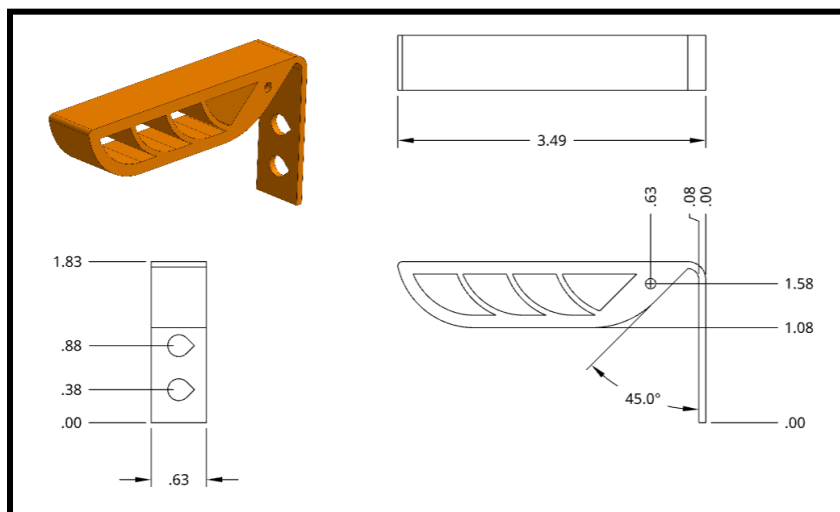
Top, side, front, and isometric views (clockwise listing) of the digit are shown with overall and key dimensions, in inches, in the resting position.
